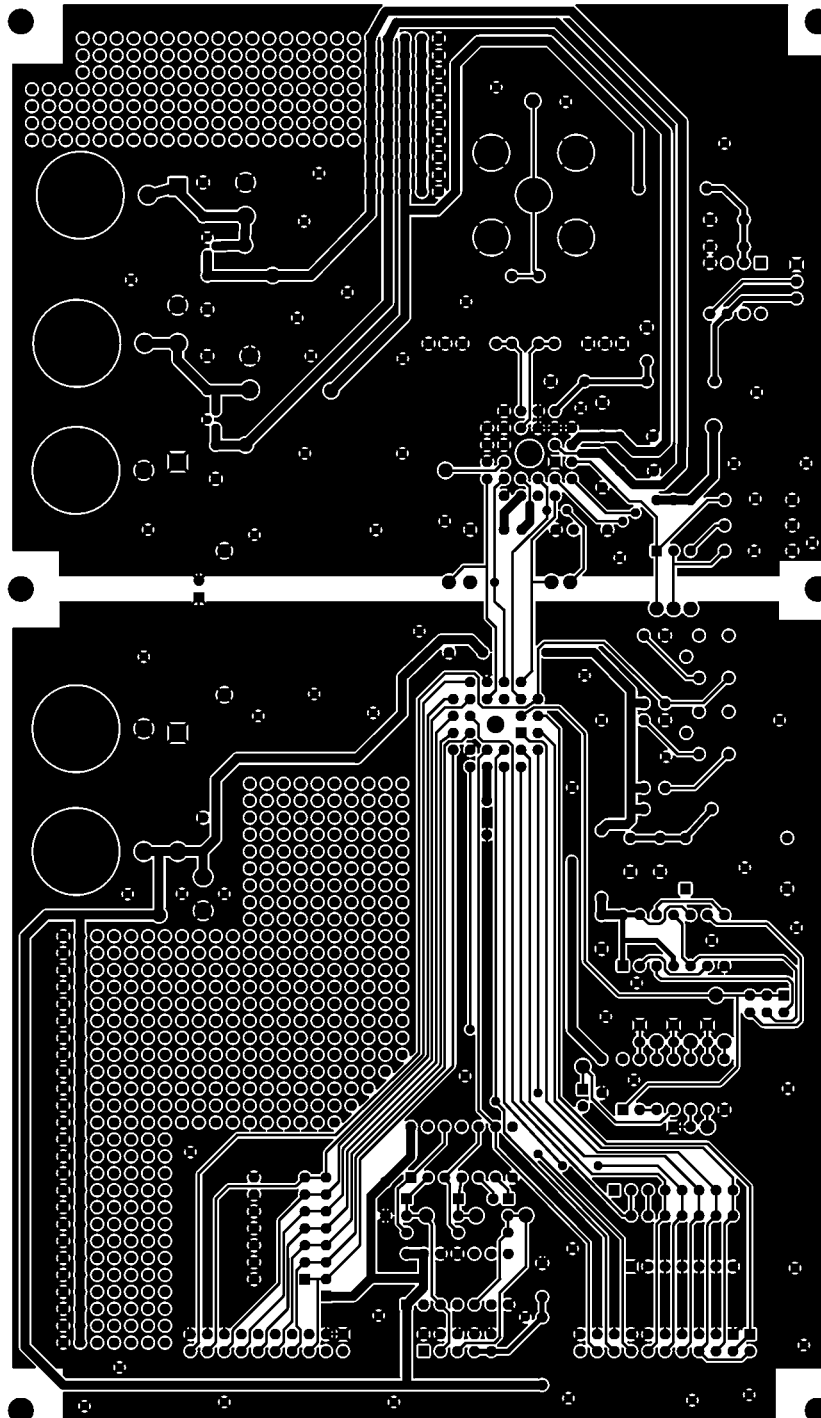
CDB5321 (Rev. C) Solder Side Layer (Not to Scale)
